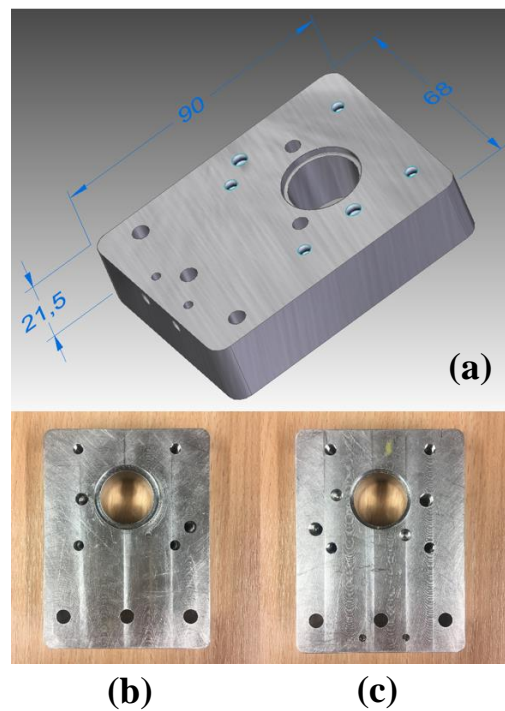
Motor-pump mounting plate. (a) Motor-pump mounting plate model and dimensions. (b) Motor side. (c) Pump side.
